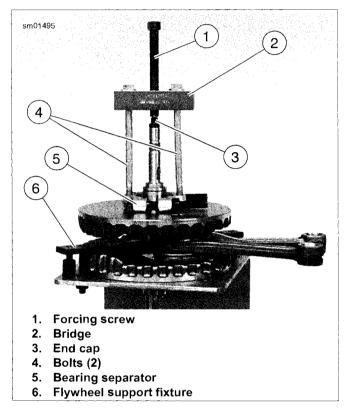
Pulling Pinion Shaft Inner Bearing
